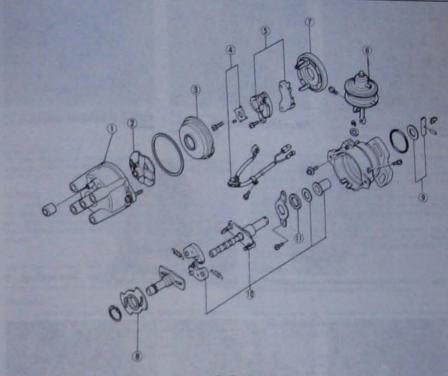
Exploded view of the distributor - B3 and B5 engines (Sec 7)
